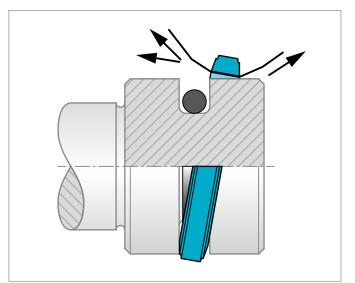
Fitting the seal ring onto the O-Ring in the groove
